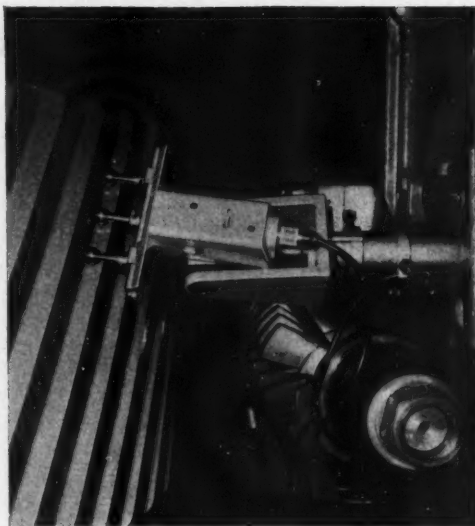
In this close-up view, the Höfler type EVZM measuring head is seen set up on a Liebherr L.3200 hobbing machine for checking a large-diameter helical gear for tooth thickness and concentricity. This measuring head, and others in the Höfler range, is intended to be connected to an electronic base unit incorporating a paper strip recorder
